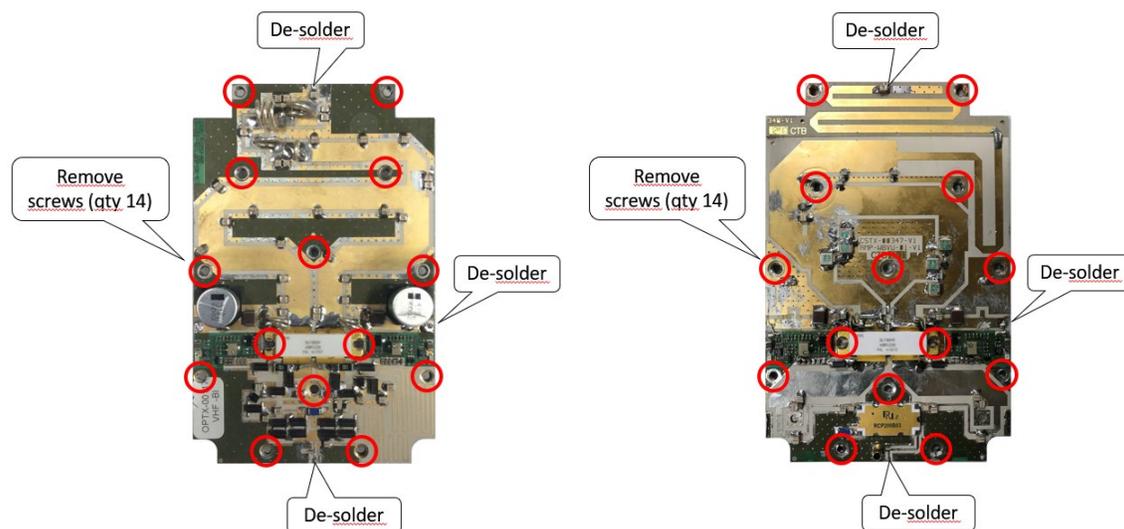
RF pallet removal – Band 1 (left) or Band 3 (right)
